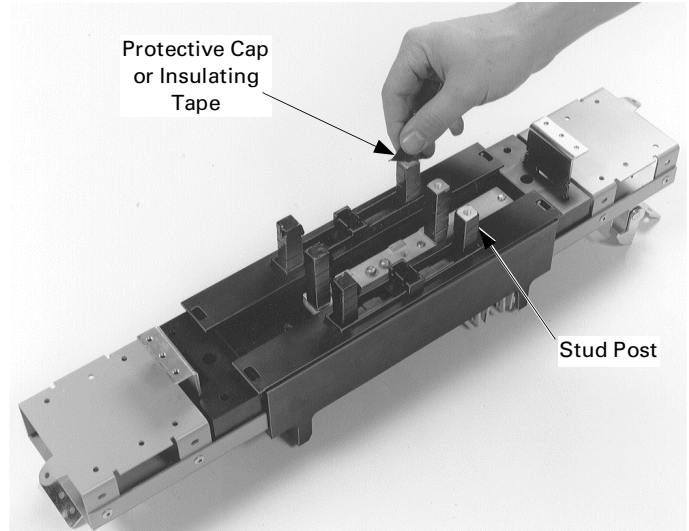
Removing the caps or tape from the stud posts of the breaker module.
